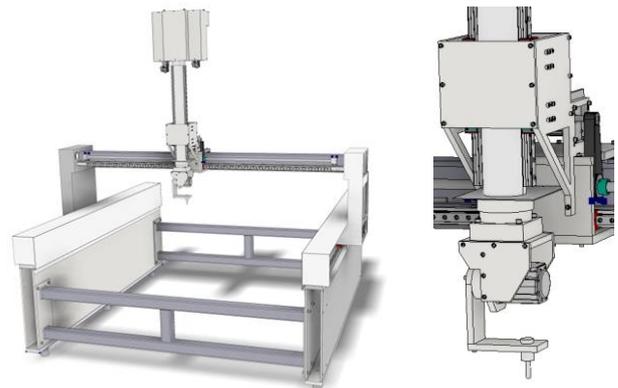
Model of the machine's tool support HWM-P1520/1-3D
